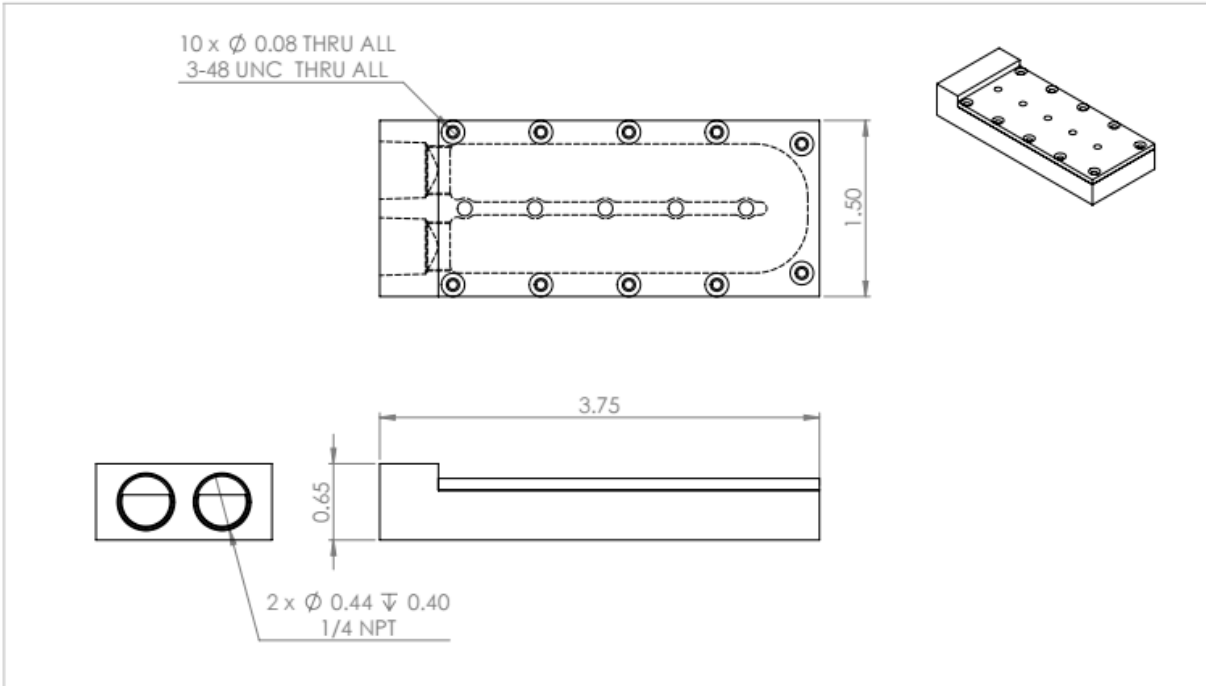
Engineering drawing of aluminum SEM peg mount for wind tunnel test section.
